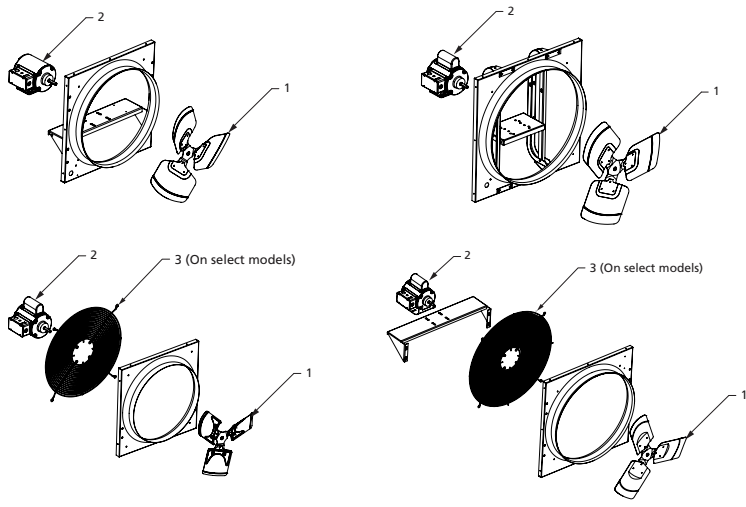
Repair Parts Illustration for Commercial Exhaust Fans
